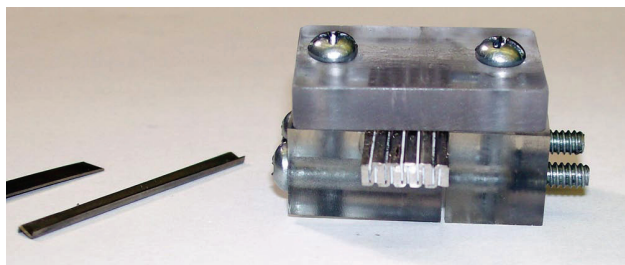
Left: Bent strip of alumel. Right: Long thermopile (5 bent alumel strips, 6 chromel strips, 10 ZTA strips) assembled in jig for spot welding.
